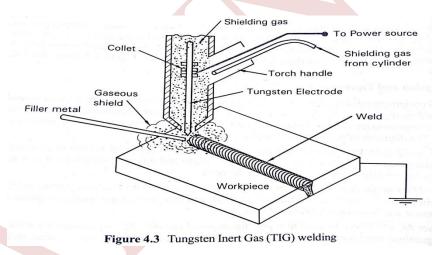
Tungsten inert gas welding (TIG)
